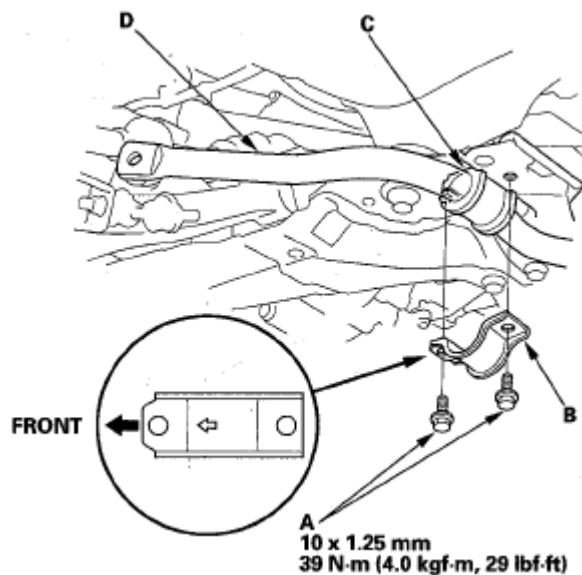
Identifying Bushing Holders Flange Bolts With Torque Specification
